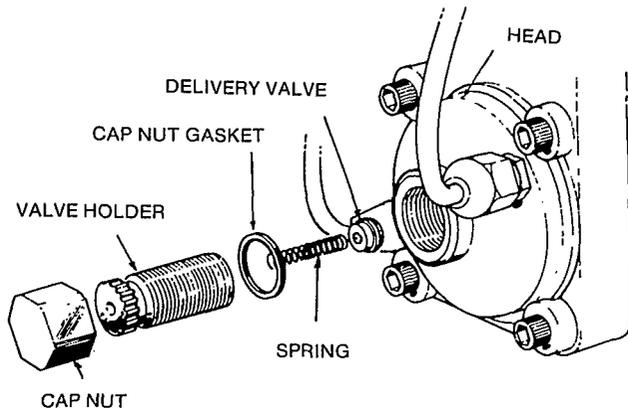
LATE MODEL DELIVERY VALVE ASSEMBLY
